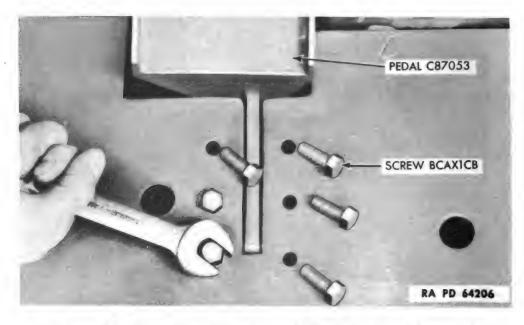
Removing Rear Pedal Shaft Bracket Assembly
